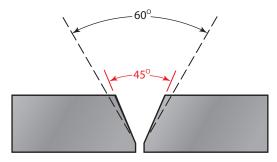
A smaller groove angle reduces both weld time and filler metal required to make the weld.
